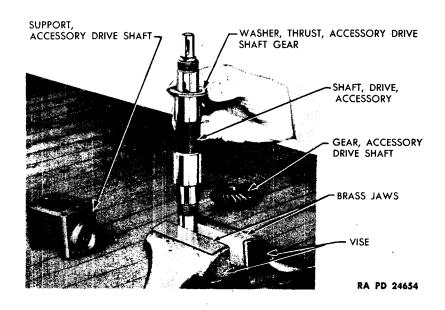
Installing Accessory Drive Shaft Gear Thrust Washer On Shaft
